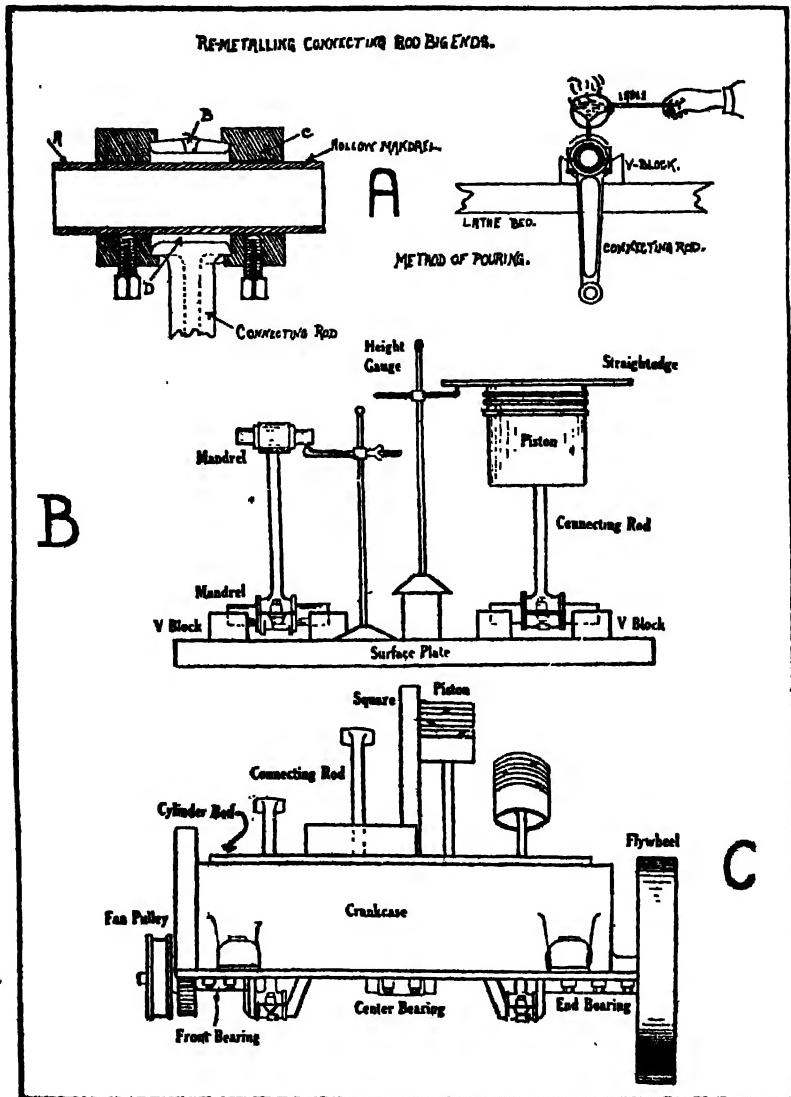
Showing Simple Method of Remetalling Connecting Rod Bearings at A, and Ways of Measuring Parallelism of Upper and Lower Connecting Rod Bearings at B and C.
